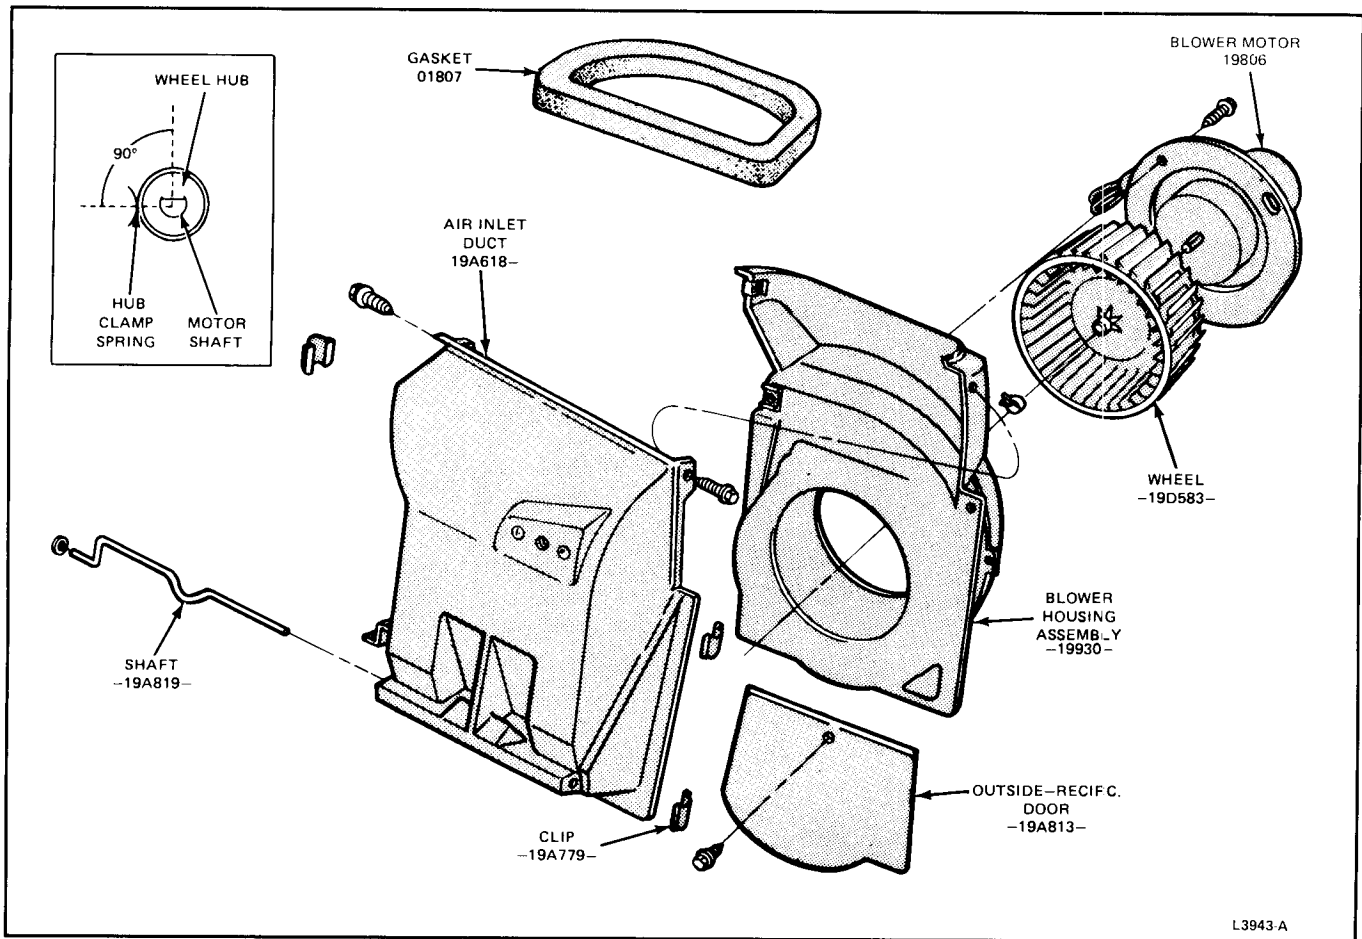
Air Inlet Duct and Blower Housing Assembly—Disassembled
